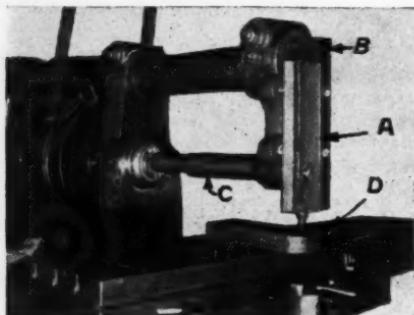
Milling Machine Equipped with Nibbling Attachment
